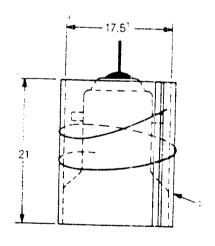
Approximate dimensions of test lampholder for B15d (unskirted) cap.
